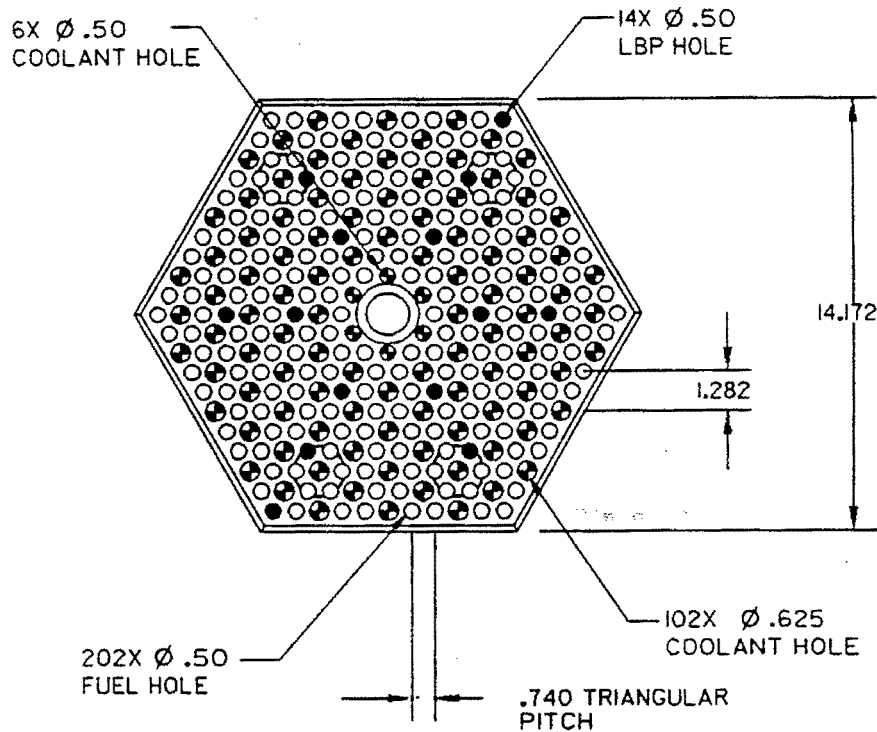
Cross-Sectional View of the Thermal Assembly (*Dimensions in inches*)
